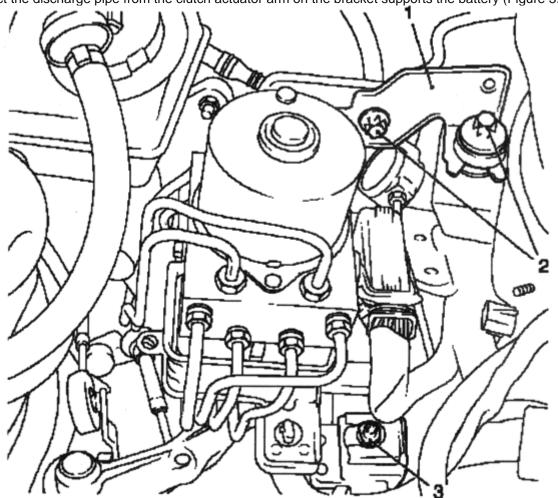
Withdrawal Module antilock system Brakes: 1 - upper bracket, 2 - mounting screws, 3 - bottom bracket
